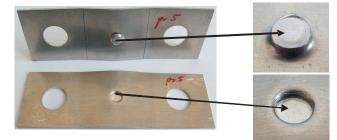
R-PJ joint after pull-out test: a) bottom sheet, b) top sheet
